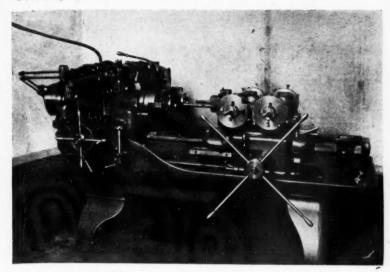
Machining differential case on double spindle Hartness flat turret lathe
